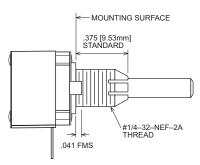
375 (9.53mm) Diameter Bushing, Plain Shaft
